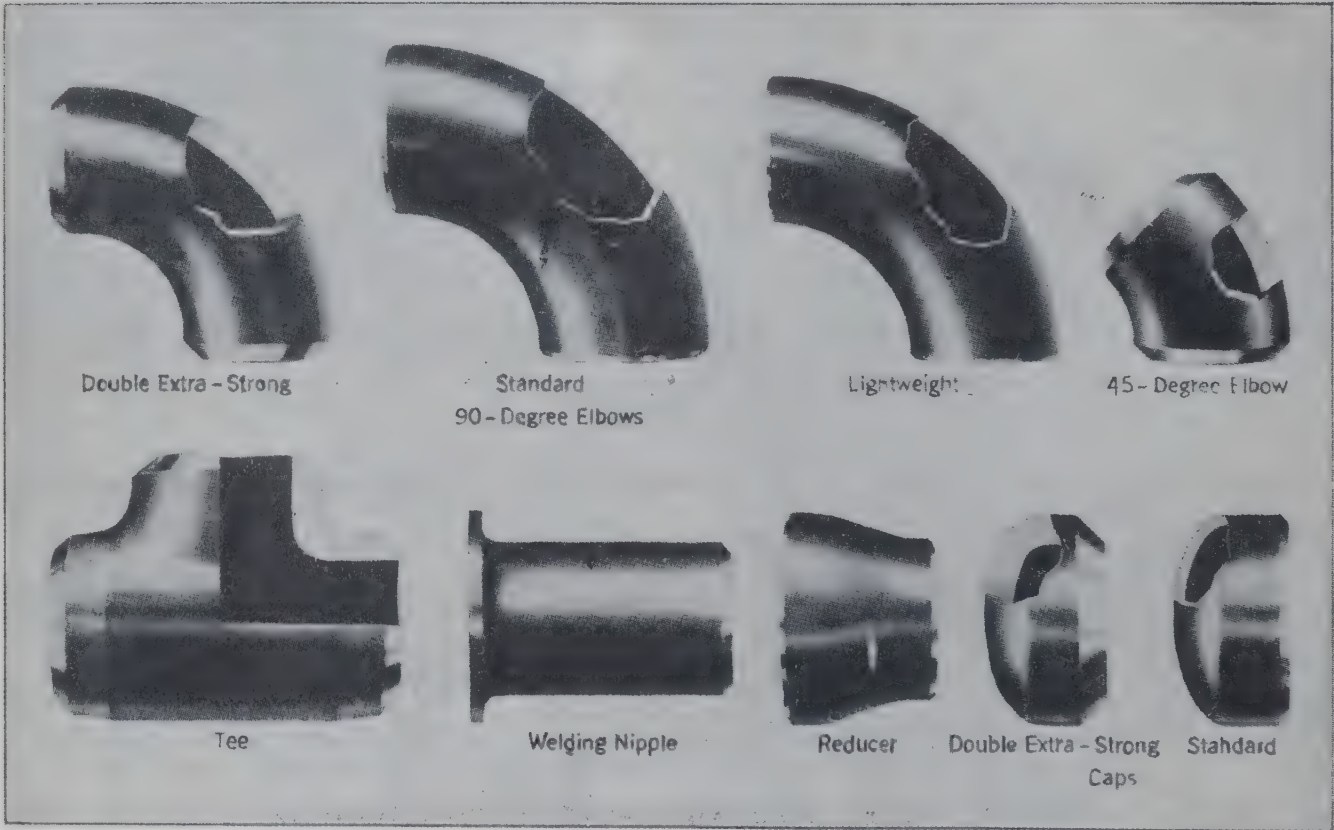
Typical fittings for butt-welded lines. (Walworth Co.)
